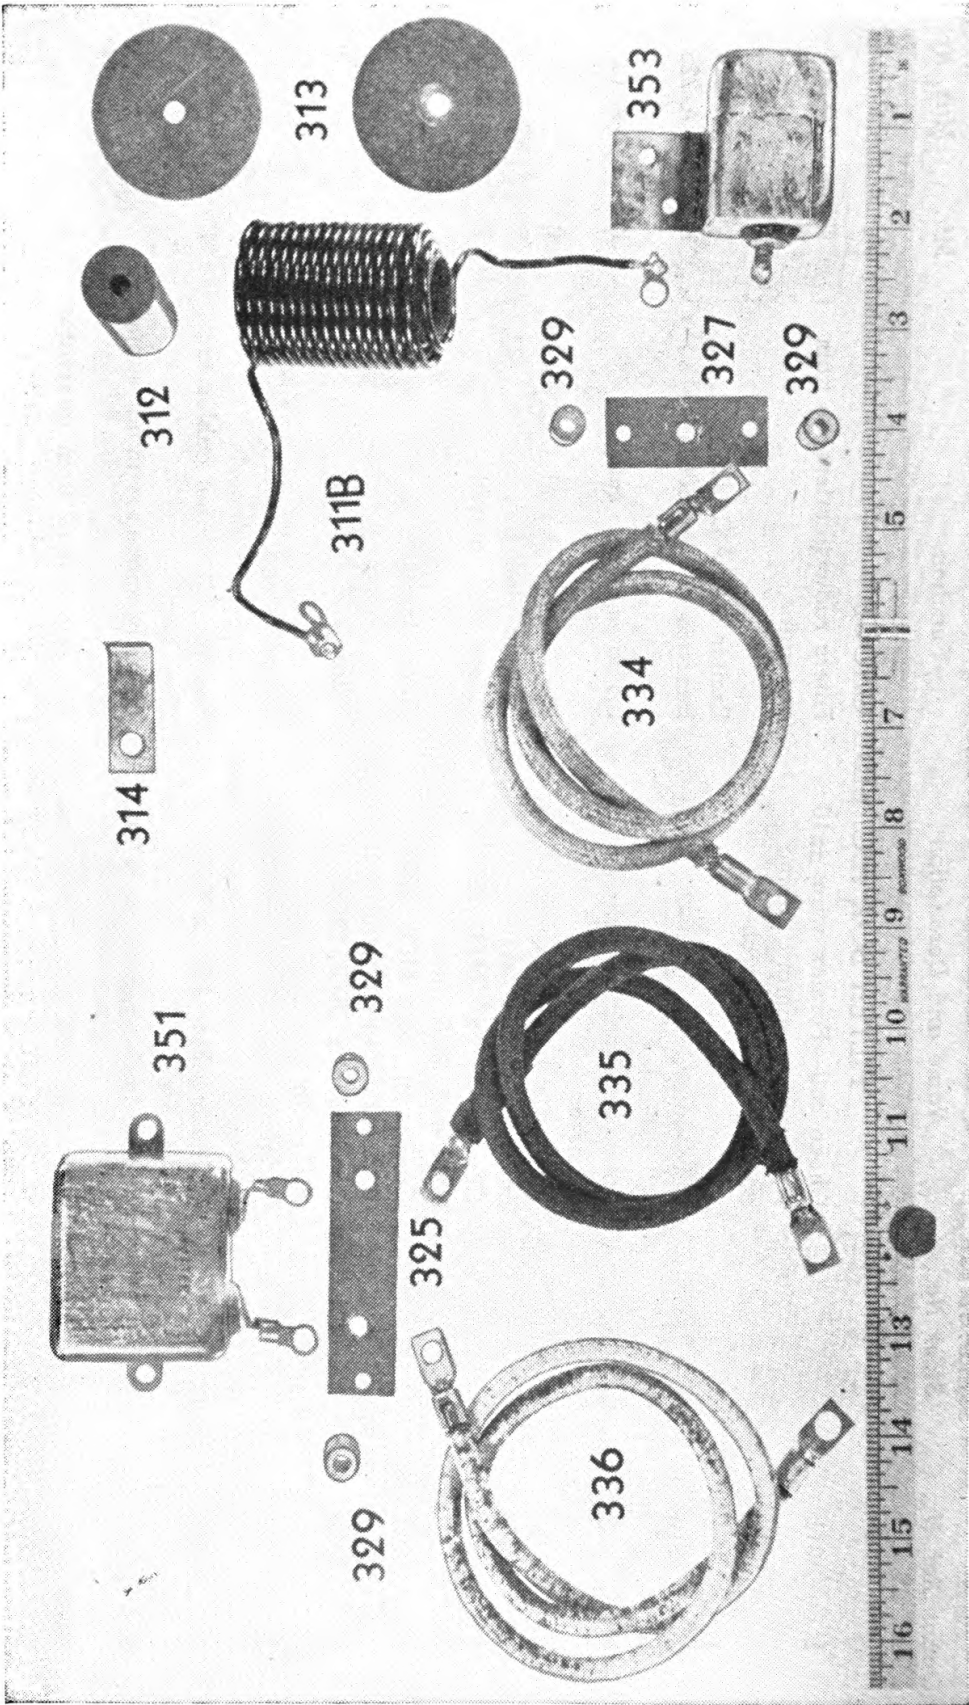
FILTER BOX GROUP—D.C. SIDE
